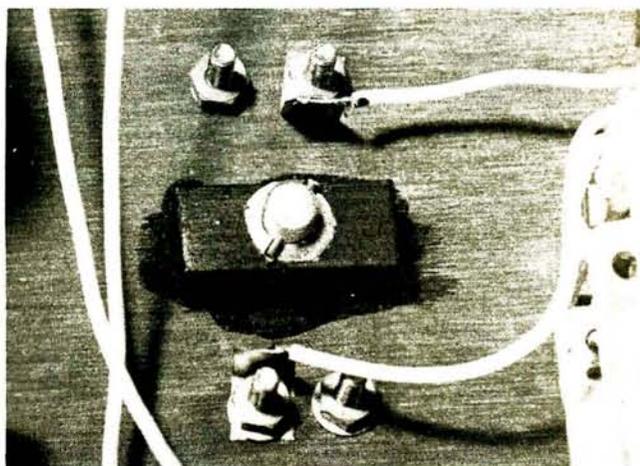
Constructional details of the stud switches. Further details can be seen in the photograph below
